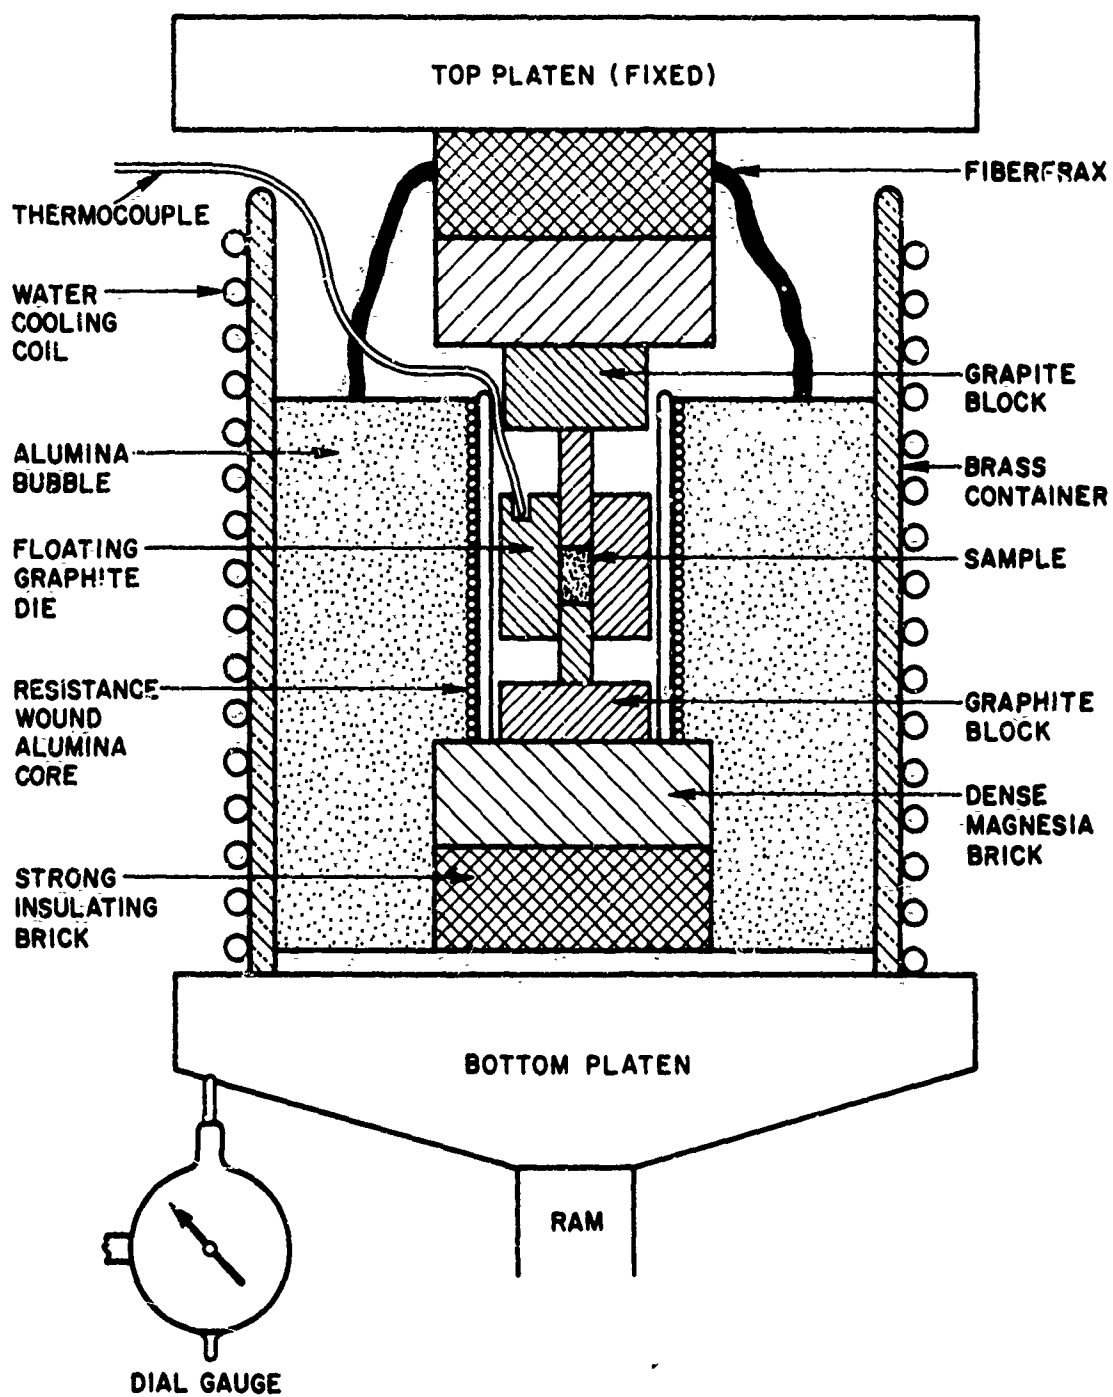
Interior Assembly of Hot Press for Fabrication of 3/4" Diameter Specimens
